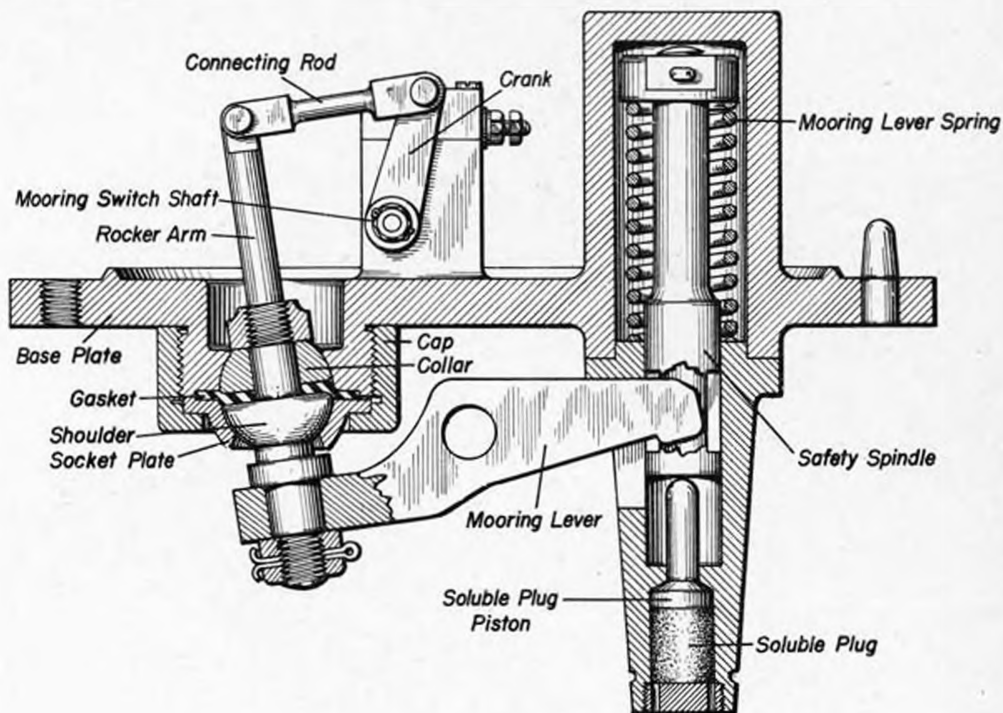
Mine Type JJ, Base Plate, Sectional View
